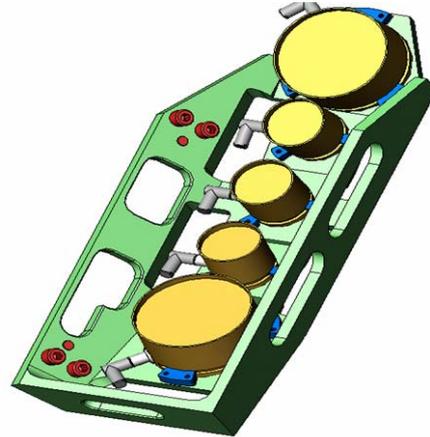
CAD view of transducers arrangement for nozzle inspection
